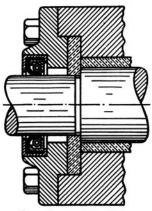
When grease is used as a lubricant, it is sometimes desirable to assemble a single seal to keep dirt from reaching the bearing rather than retain the grease in the bearing. The illustration shows an installation wherein a right-hand spiral groove is cut in the bearing bore to lead the lubricant outward. Surplus grease is forced past the seal, thereby keeping the bearing clean.
